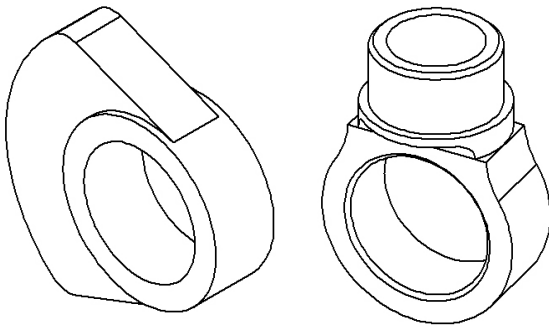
Rod End Mounts (Wheel-side and Chassis Side)
